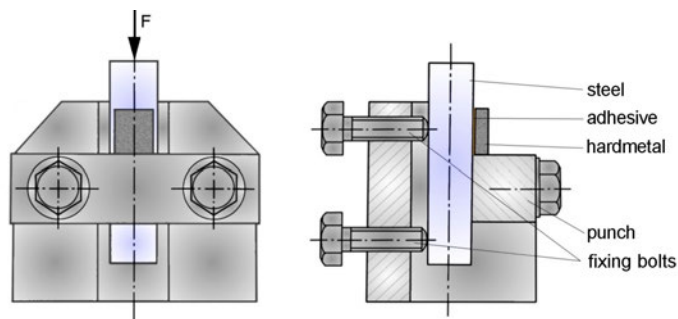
Device for shearing test of adhesive joints of hardmetals with steel
